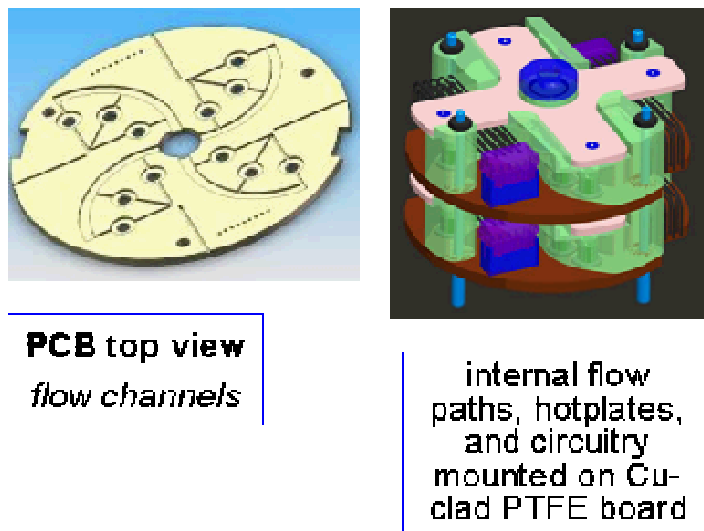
Top view of the 16 hotplate PC board (12 samples and 4 thermal conductivity detectors), and the compact fixture used to stack two boards within a single pressure vessel.
